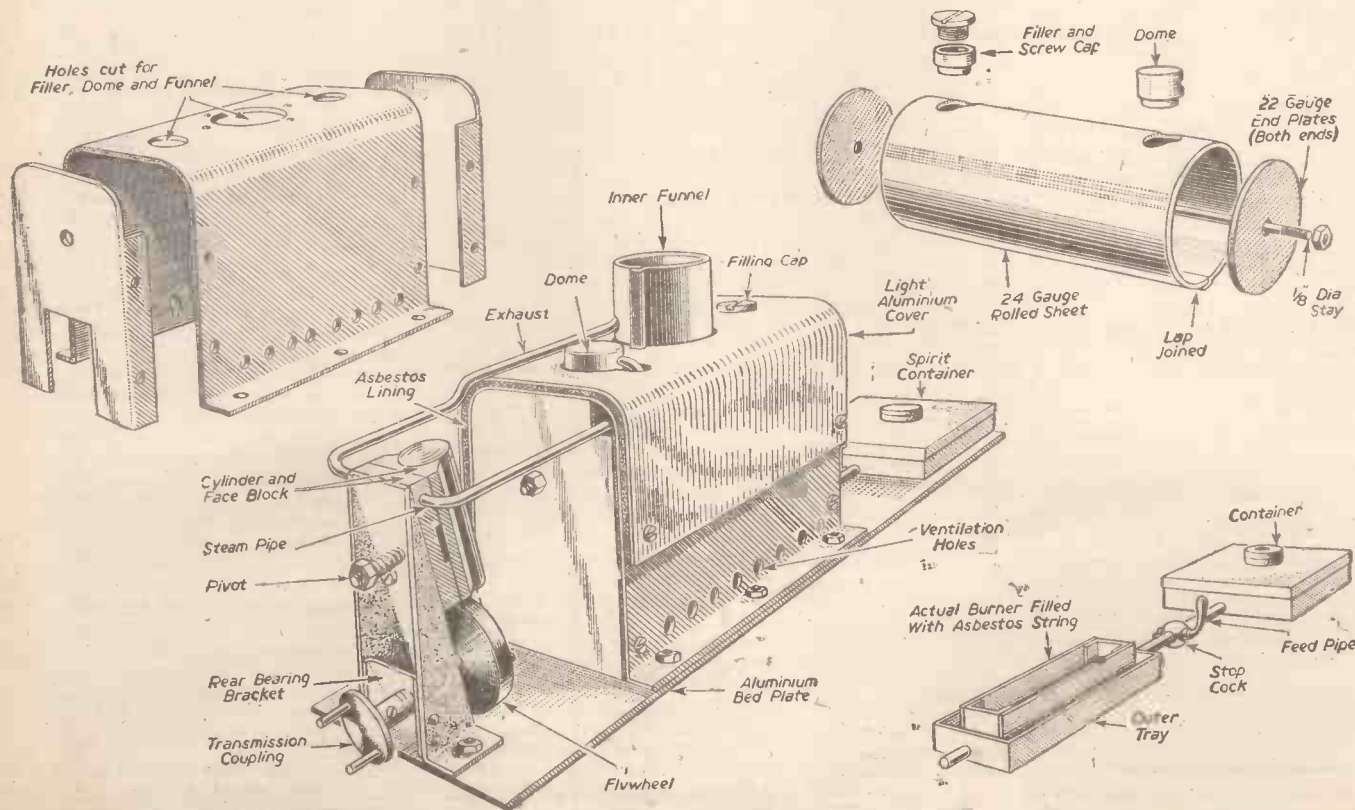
Perspective view of the complete power unit, and details of boiler, casing and burner.
